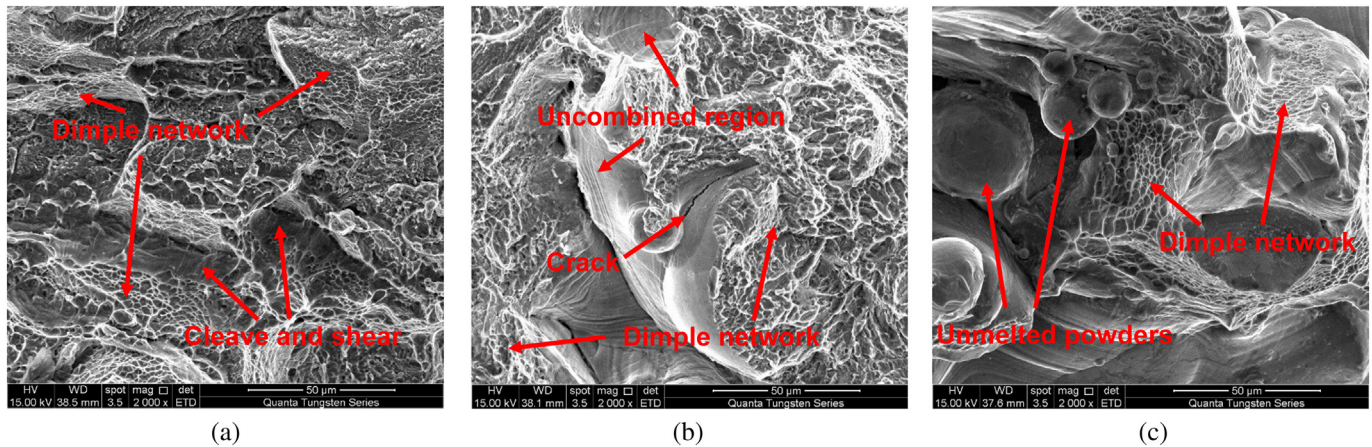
Tensile fracture surfaces of SLMed Ti6Al4V samples fabricated at various scan speed ($P = 225$ W): (a) 600 mm/s; (b) 1000 mm/s and (c) 1200 mm/s.
